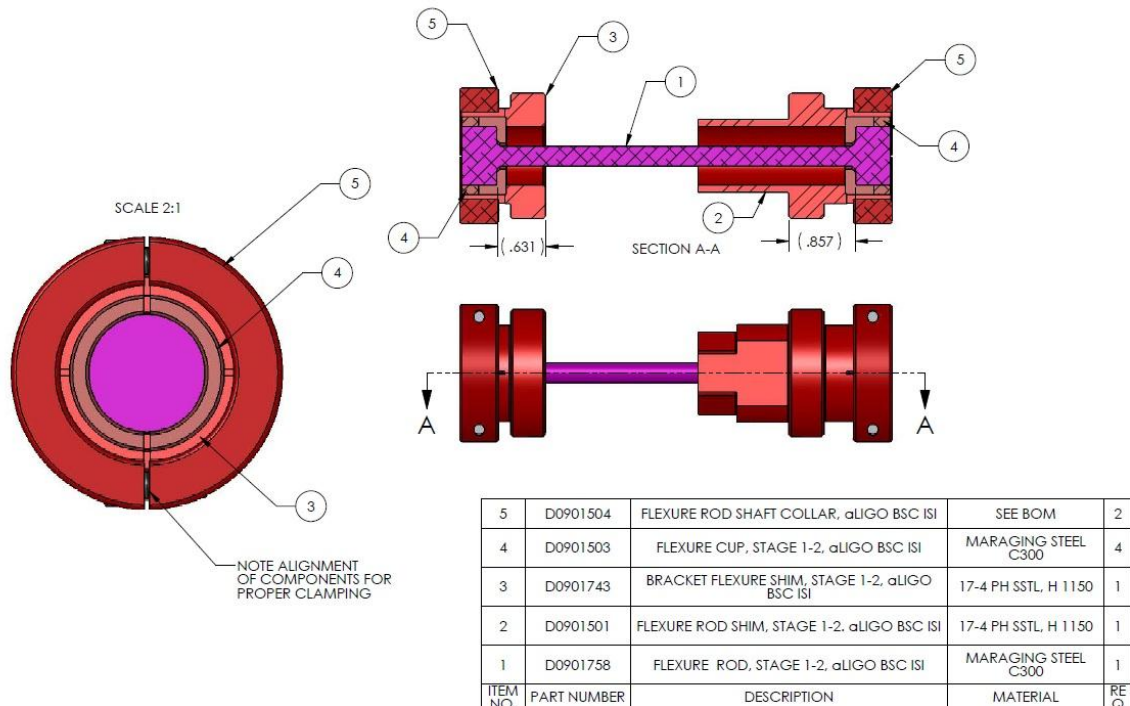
D0902104 Stage 1-2 Flexure Rod Assembly
